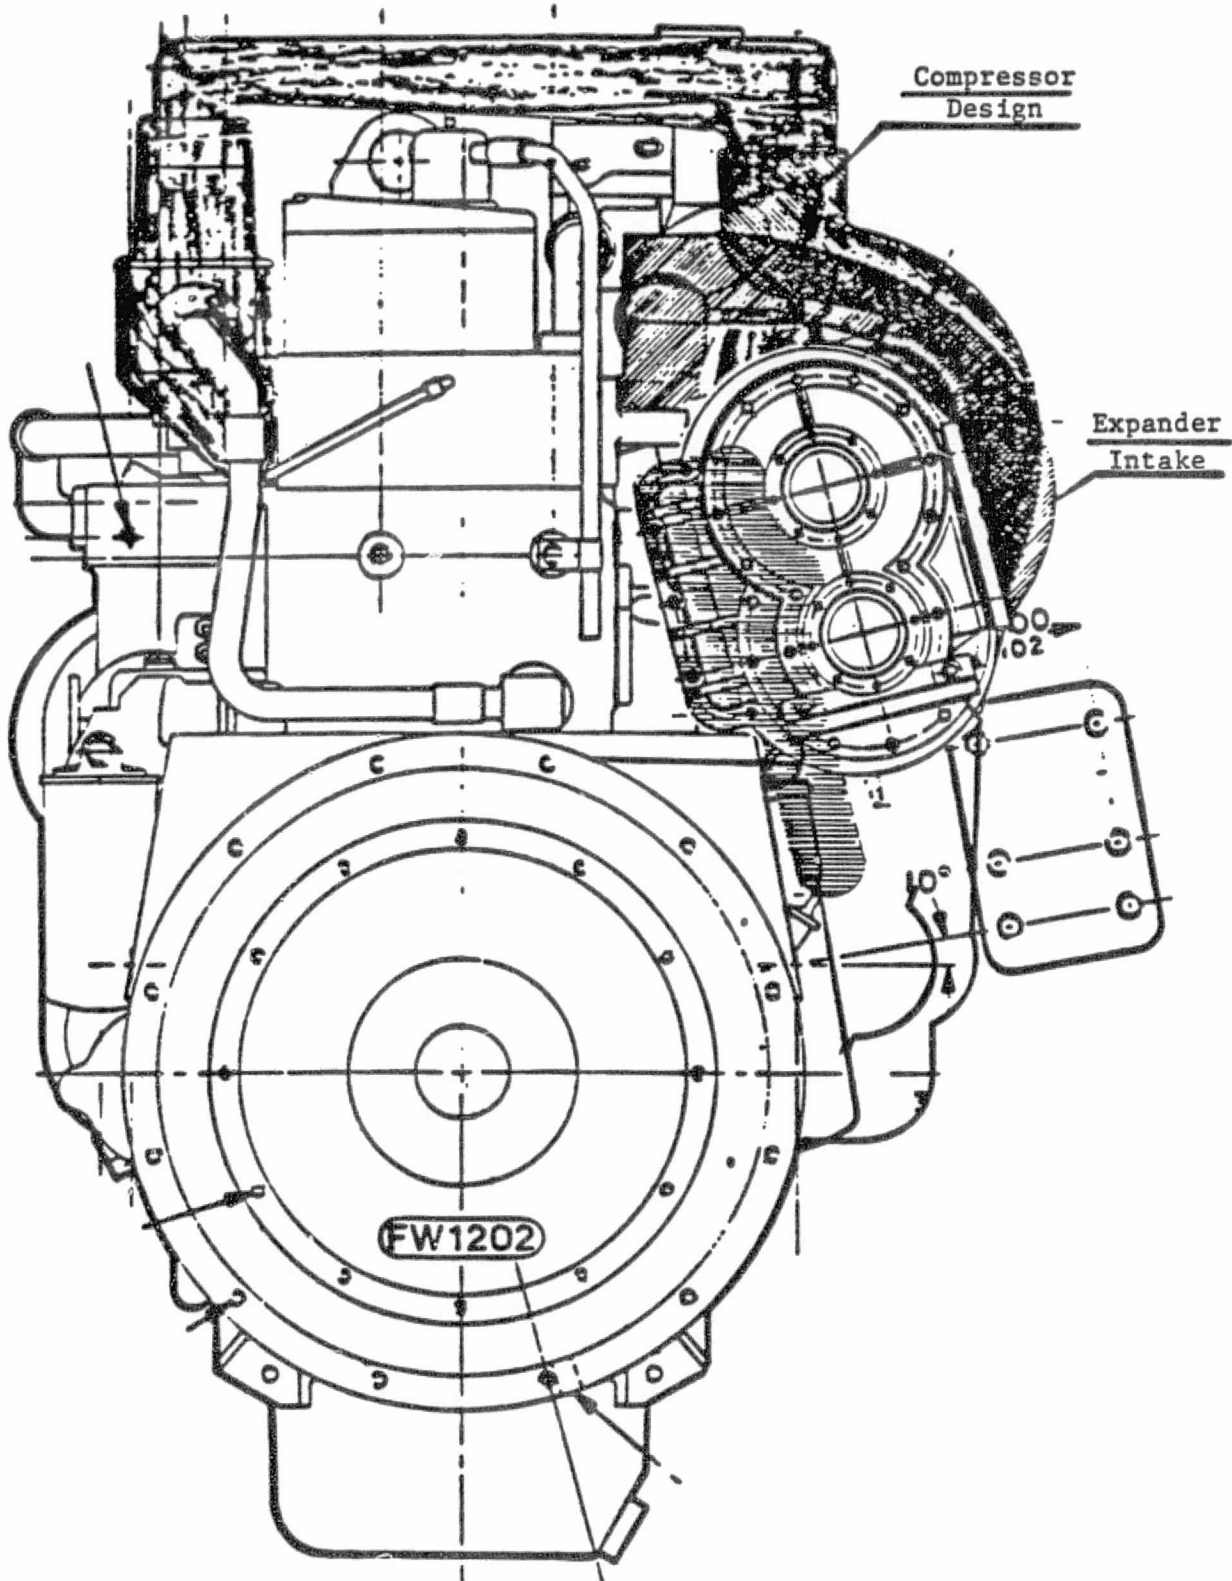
VIEW OF SCREW COMPRESSOR AND EXPANDER MOUNTING ARRANGEMENT
